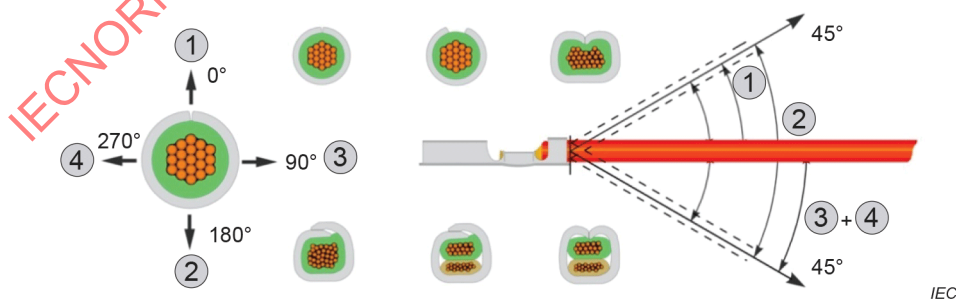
Bending test of crimped connections with uninsulated crimp barrels
